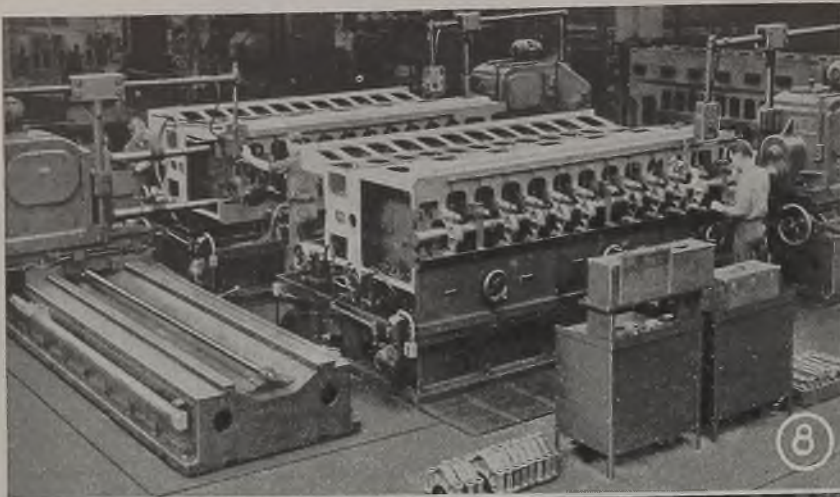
Special setup for boring crank and camshafts. Note three working heads
